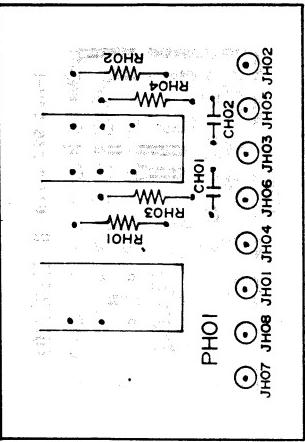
Muting Hi Filter Assembly (PH01) Component Locations
